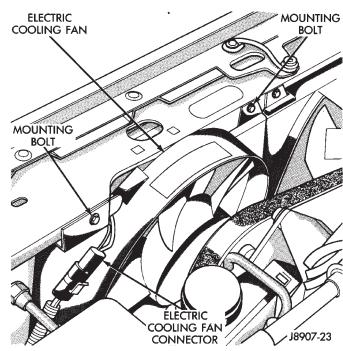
Auxiliary Cooling Fan—Remove/Install— Typical
